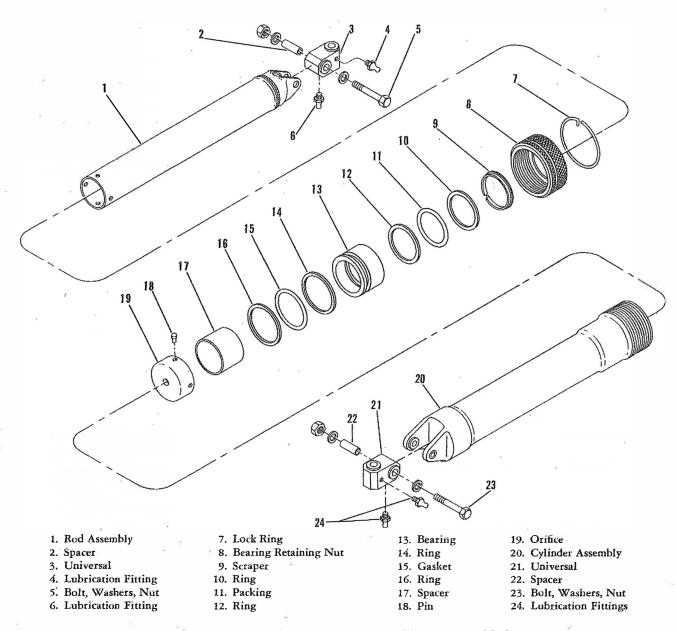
Tail Wheel Strut Assembly Disassembled
